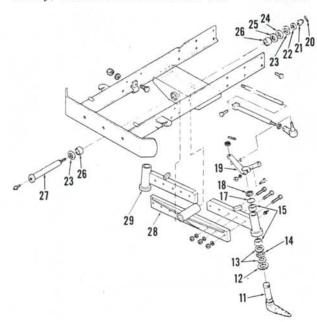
Exploded view of adjustable tread width front axle available on 1100, 1110, 1200 and 1210 models. Refer to Fig. 1 for legend except for the following:
